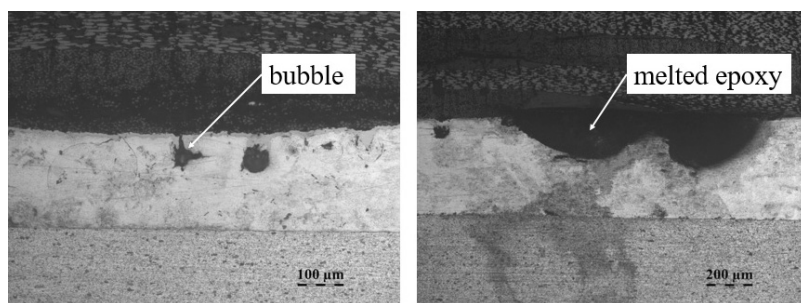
Defects in joint between 5083 Al alloy to CFRP.
